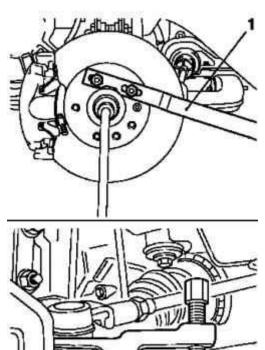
Disconnecting from the steering knuckle joints: 1 - lever, 2 - bolts fixing
